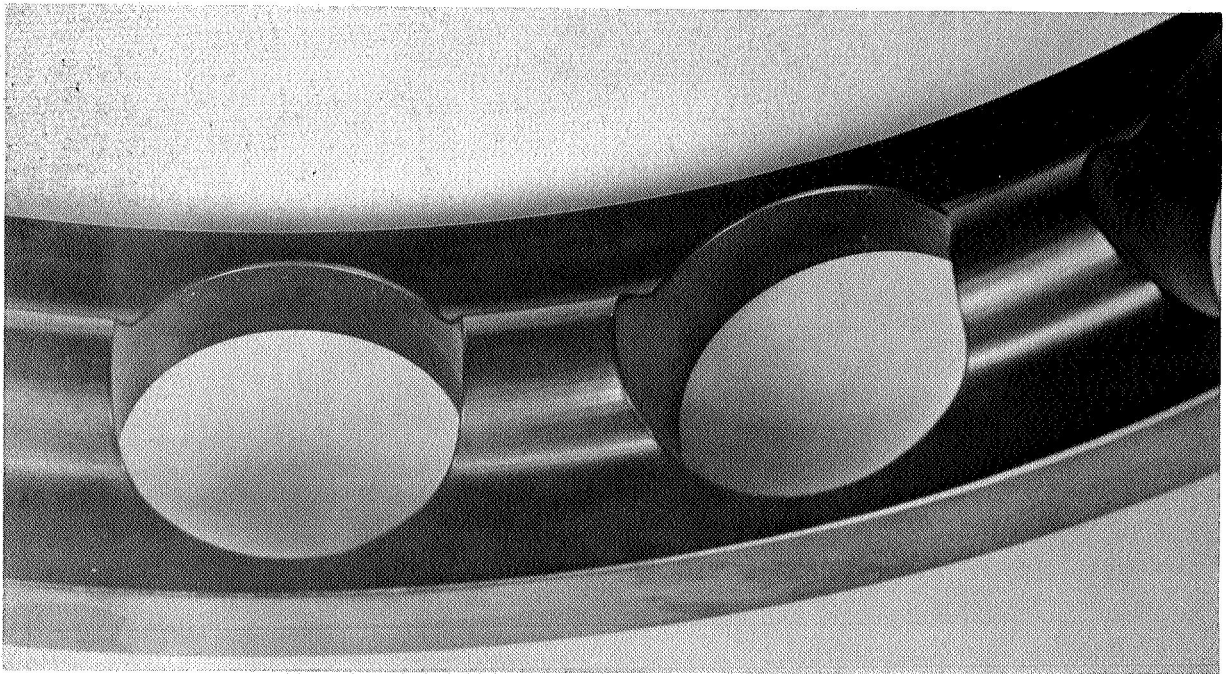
CAGE BALL POCKETS - BEARING S/N 13
